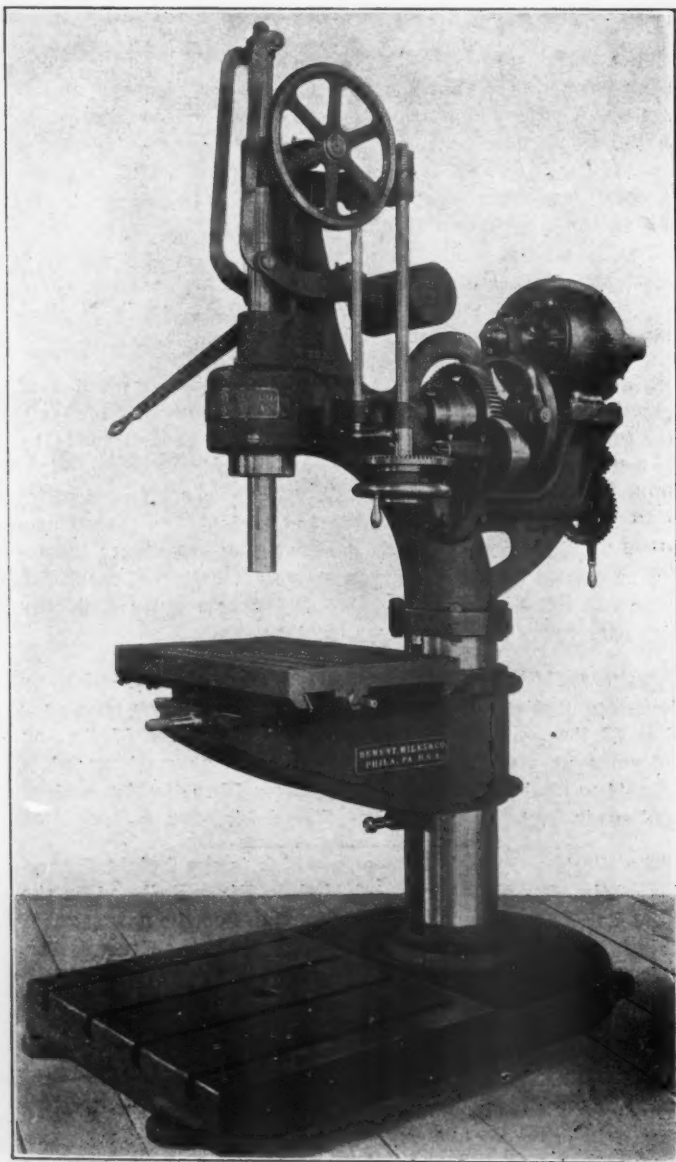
NEAT MOTOR APPLICATION TO BEMENT, MILES & CO. DRILL PRESS.
